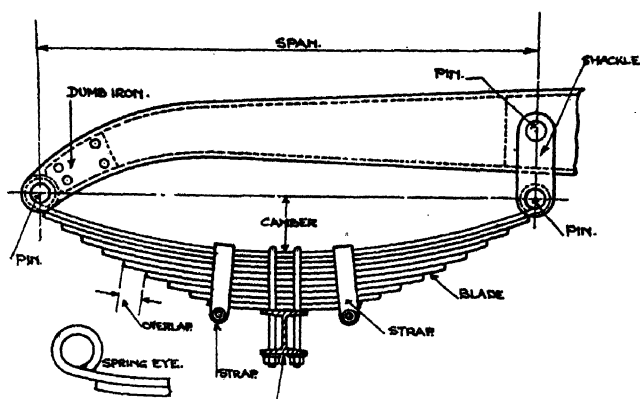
Components of a Semi-Elliptic Front Axle Spring. (Not to Scale.)
